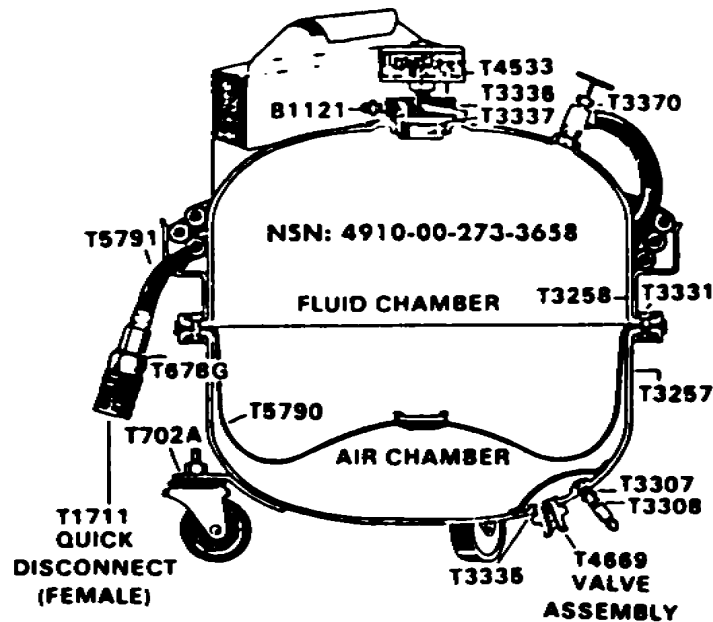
HYDRAULIC FILLER/BLEEDER
